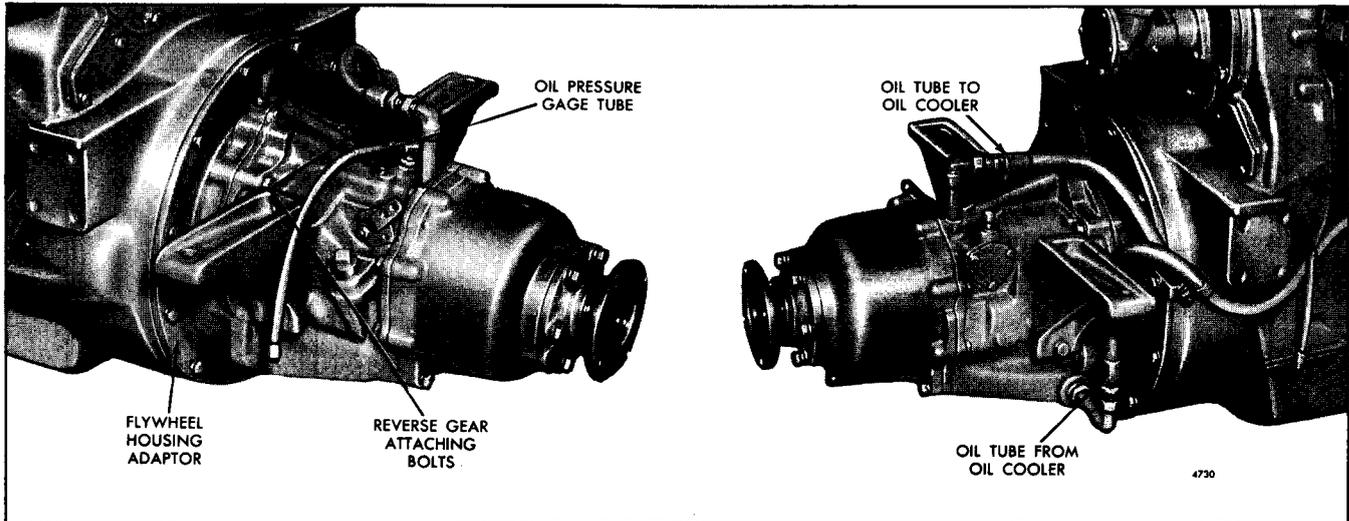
Reverse and Reduction Gear Mounting to Engine (Current)
